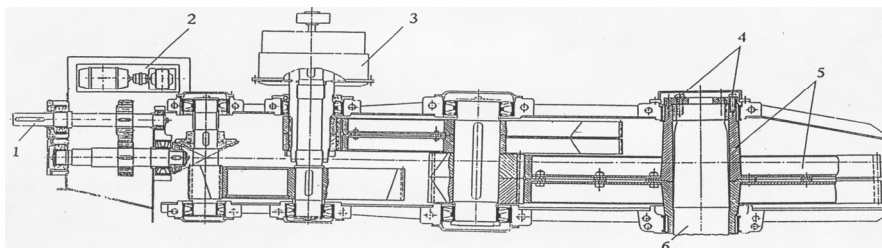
Schematic appearance of the bucket-wheel excavator drive gearbox cross-section
